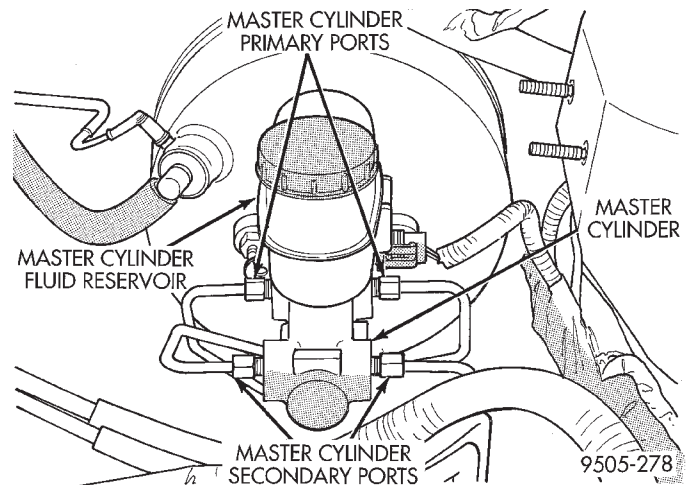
Primary And Secondary Brake Tubes Without Antilock Brakes
